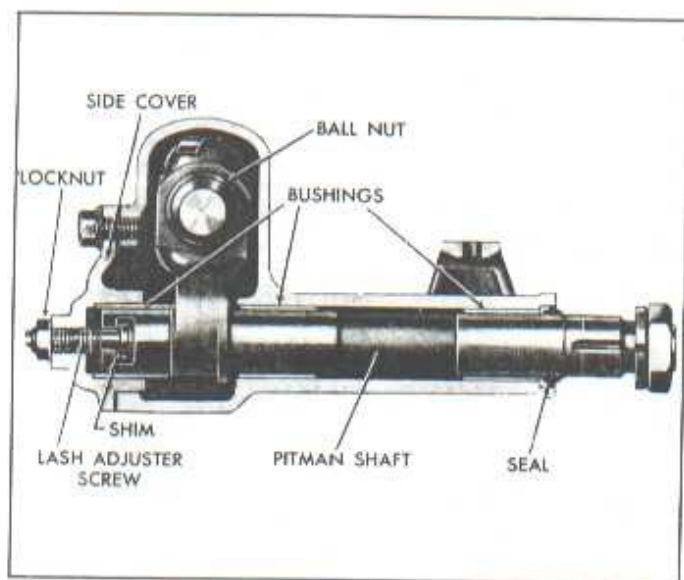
B-4--Steering Gear (Corvette and G10-30 Series Trucks)
